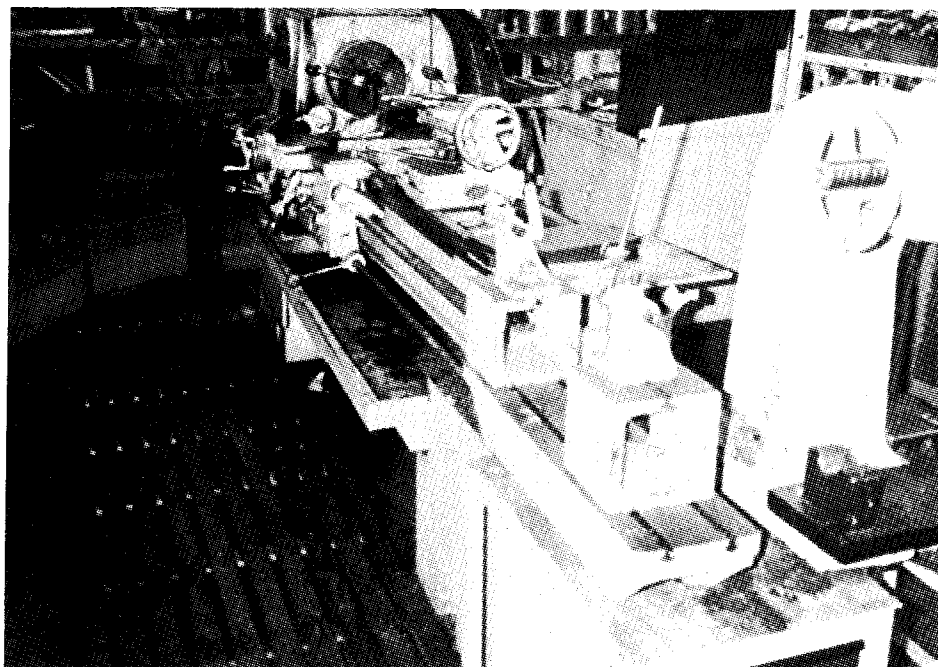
Unanchored Metal Lathe Susceptible to Sliding (Figure 4-69 of Reference 60)
